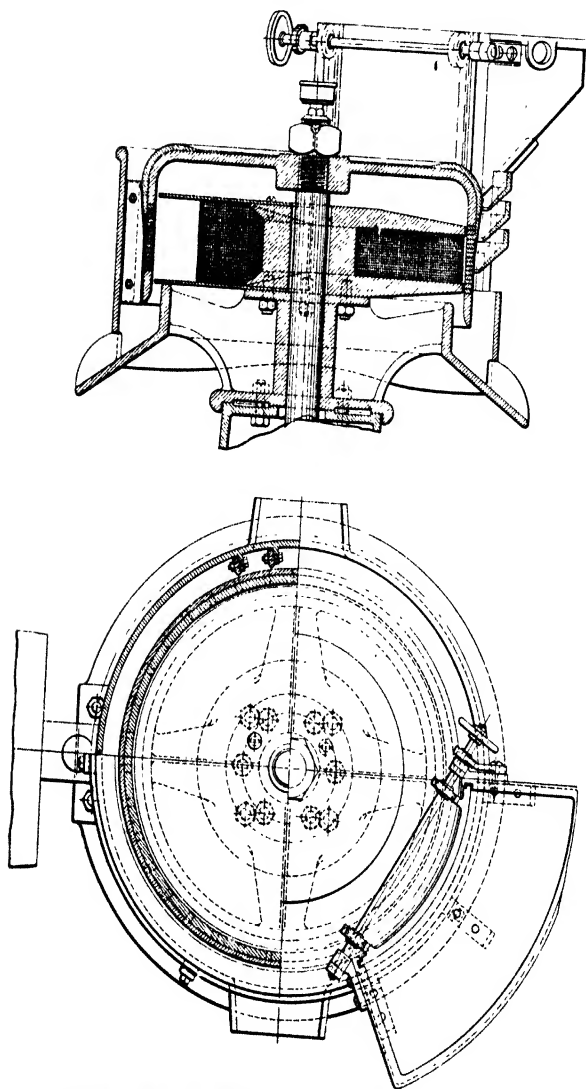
Gröndal separator, type 2. Plan and vertical section.
